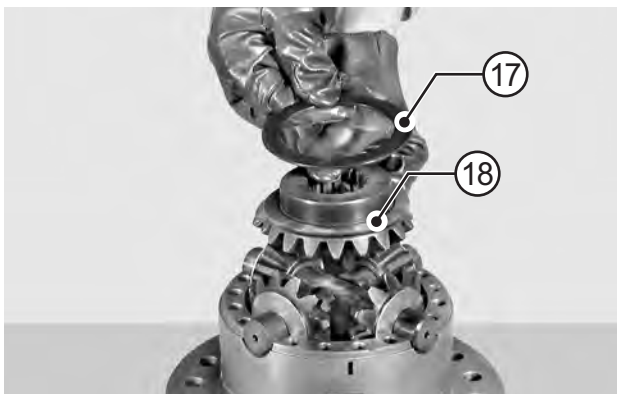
Install the planetary gear (18) and shoulder ring (17).
